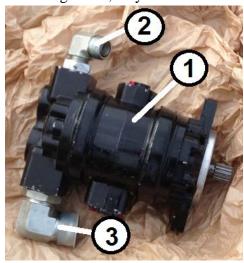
Hydraulic Pump Assembly Key 1 – Pump Key 2 – 90 deg, -12 Key 3 – 90 deg -20 to -16
